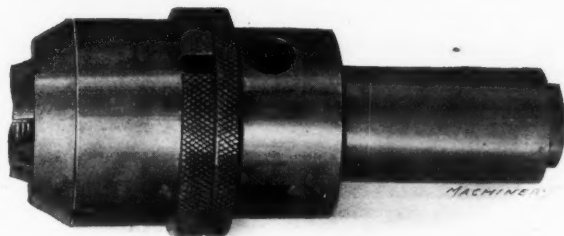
"Acorn" Die mounted in Holder ready for Use
